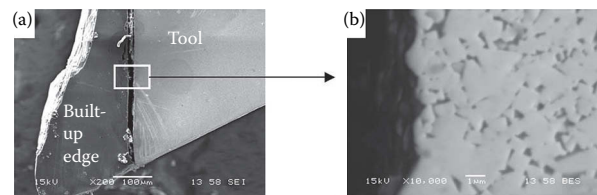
SEM images of a polished tool section after used for machining for 7 min showing (a) the built-up edge and (b) the detail of the asperities. Cutting conditions: $V_c = 60$ m/min; $\alpha = 15^\circ$; $f = 0.1$ mm/rev; $w = 4$ mm. The tool was cut into two pieces by wire electro erosion (perpendicularly to the rake face) and polished
